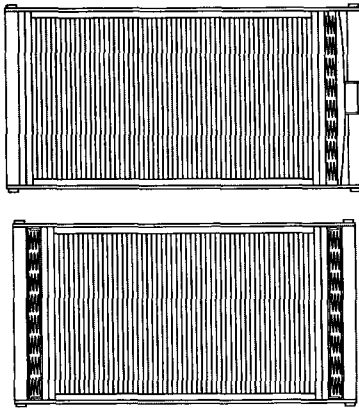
Box wrapping method using springs. Spring on one side (top), spring on both sides (bottom) (modified from Ref. 27)
